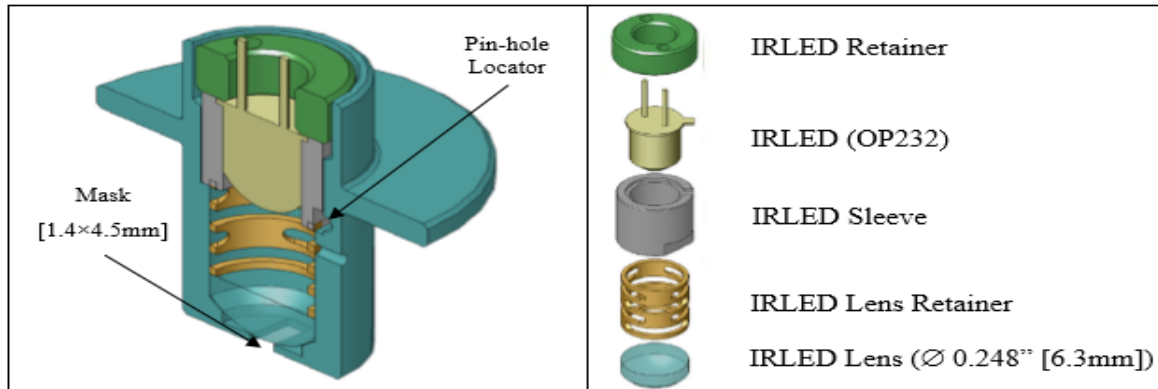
(Left) Section through IRLED carrier. (Right) IRLED carrier part explosion.
